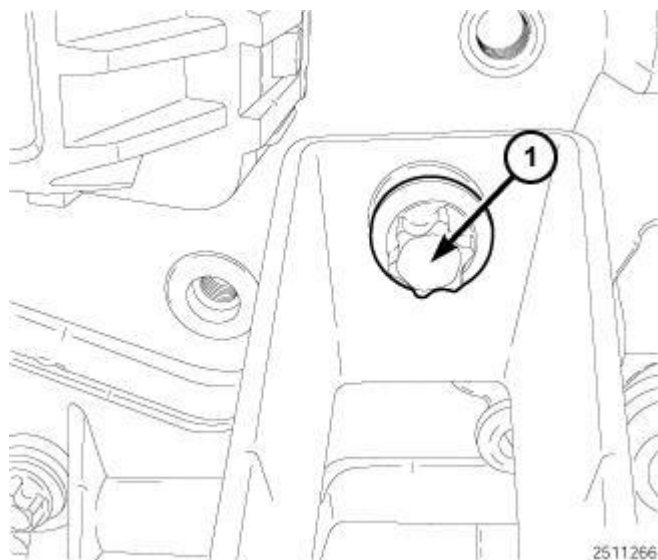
CAC Tube And Bracket Assembly Bolts
